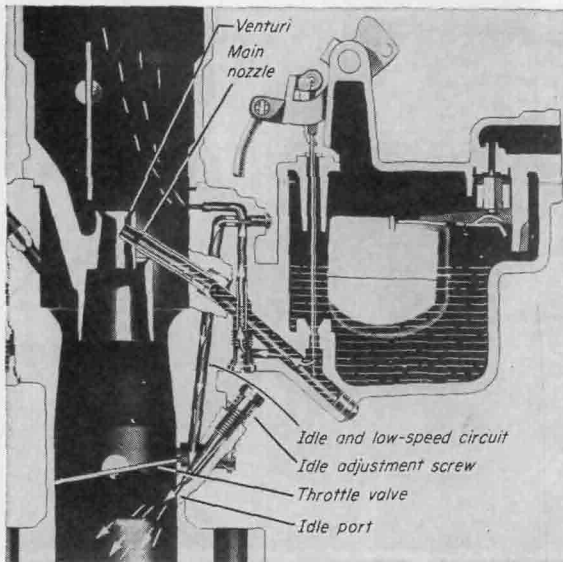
Idle-and-low-speed circuit in carburetor. Throttle valve is fully closed, and all gasoline is being fed past the idle adjustment screw. Lines indicate air; arrows indicate gasoline. (Chevrolet Motor Division of General Motors Corporation)
